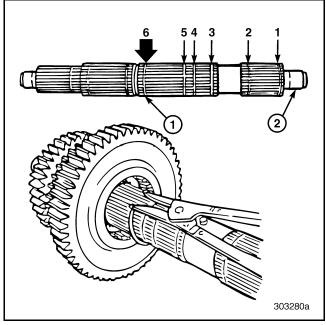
Removing Lo-Speed Gear Snap Ring (T313L/T318L Shown)
